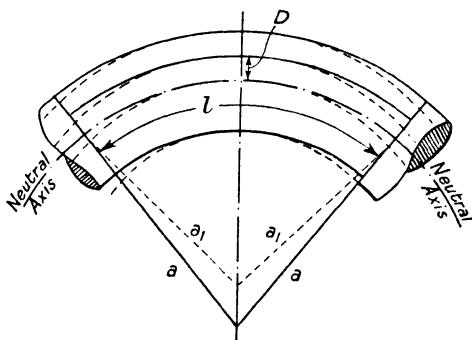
Segment of spring to illustrate theory of bending.
